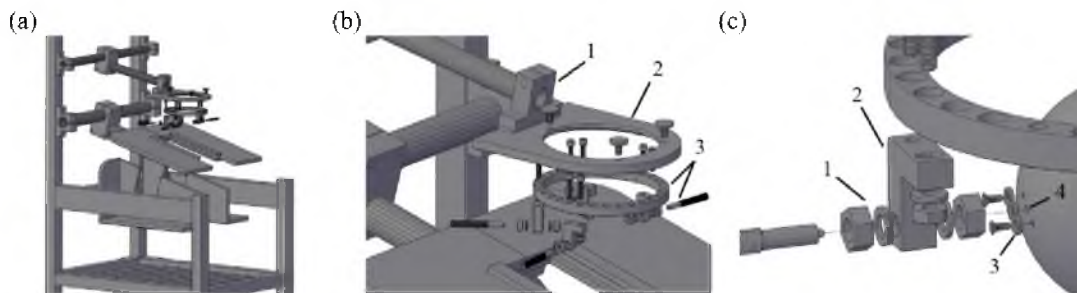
(a) Overall view of primate chair with halo device. (b) Exploded view of the attachment arm (1), attachment plate (2), and halo frame with posts and skull pins (3). (c) Enlarged view showing insertion path of skull pin. The pin passes through stainless steel nuts and washers (1), an aluminum offset post (2), a titanium plate that is attached to the skull with titanium cortex screws (3), and into a predrilled hole in the skull surface (4).
